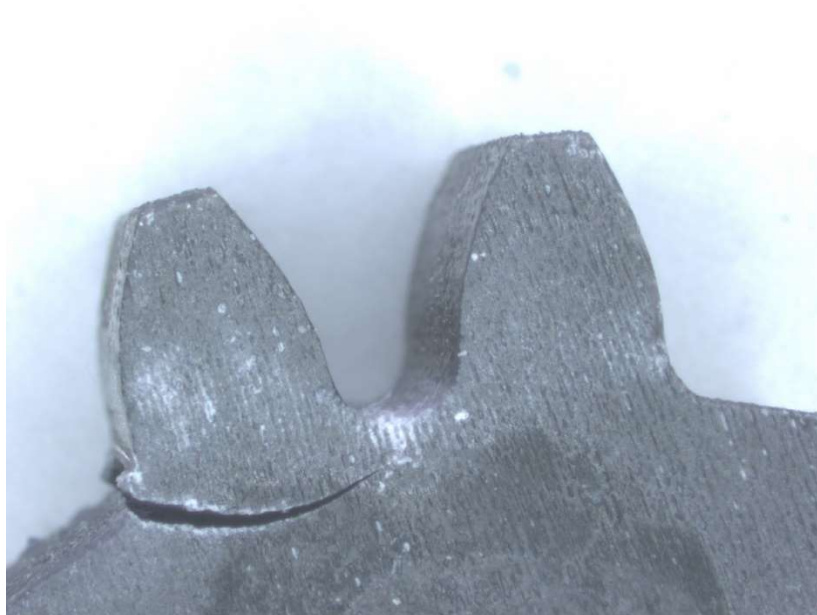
Projet 3500 On-Surface Gear Tooth Print (Post testing)
